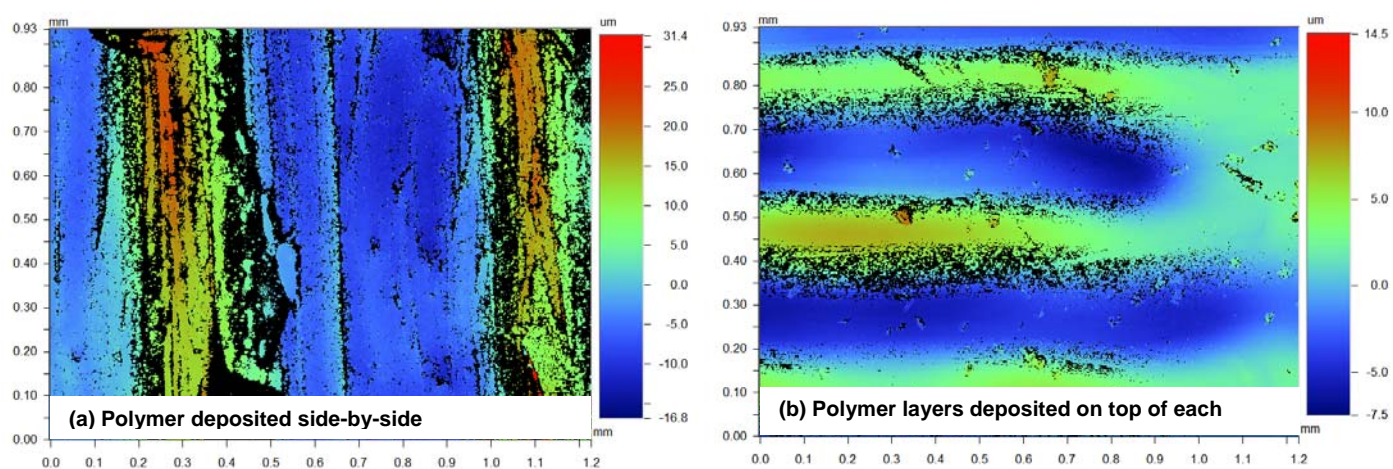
White light interferometer profiles of (a) top 3D Printed top surface and (b) side view showing the layer-by-layer pattern produced.
